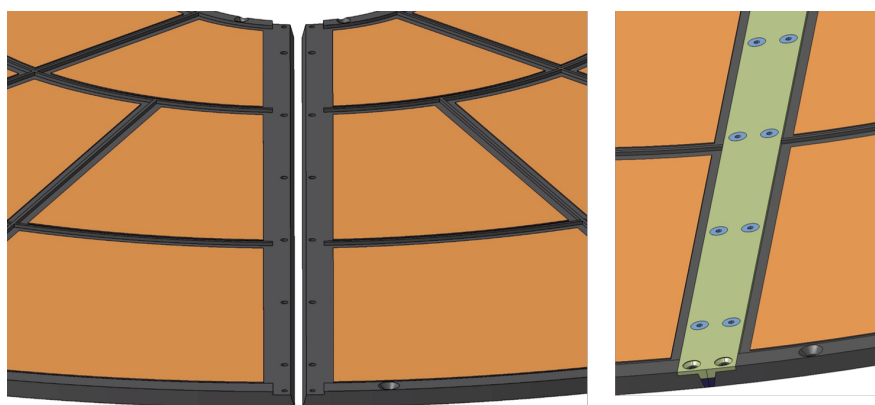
Detailed 3D view of the front cover junction connecting the two half moon parts. The central rod, on the right, is bolted on the two parts with trapezoidal elastomer gasket in place
